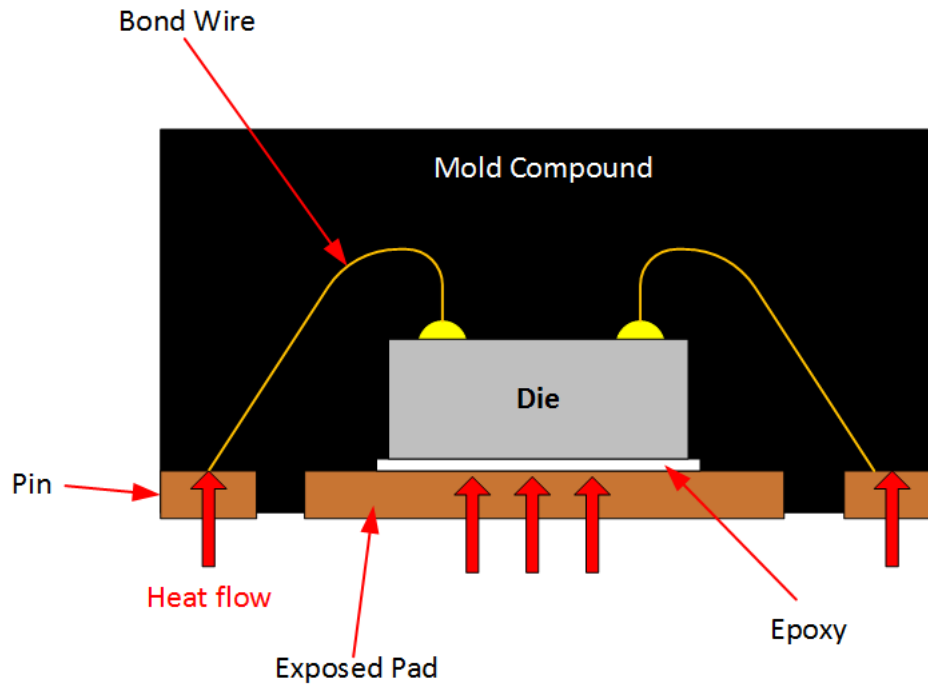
Heat Transfer WSON (TMP116[DRV]) Package Cross Section
